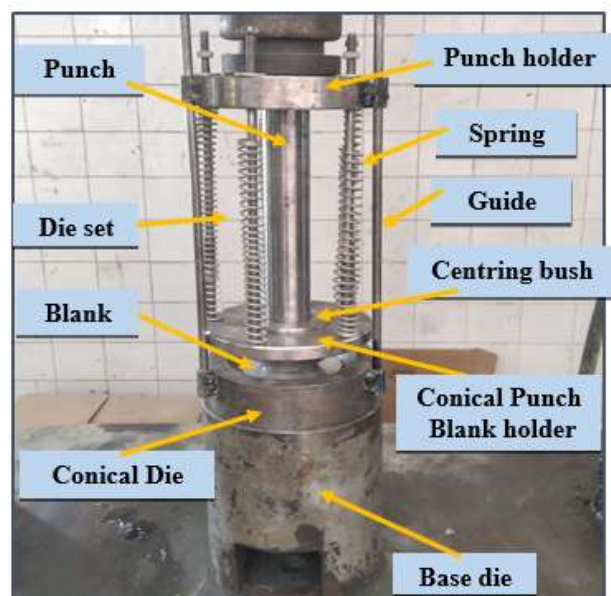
Components and parts for set assembly of the innovative deep drawing tool
